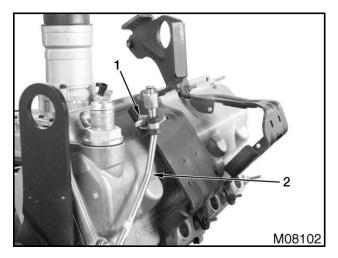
Exhaust Back Pressure (EBP) tube assembly
